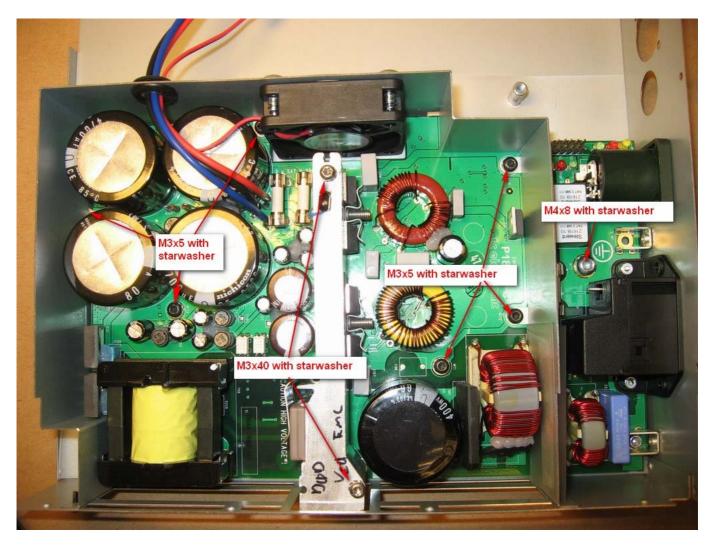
Mount the power board in the inner box, using the screws shown in the picture.
